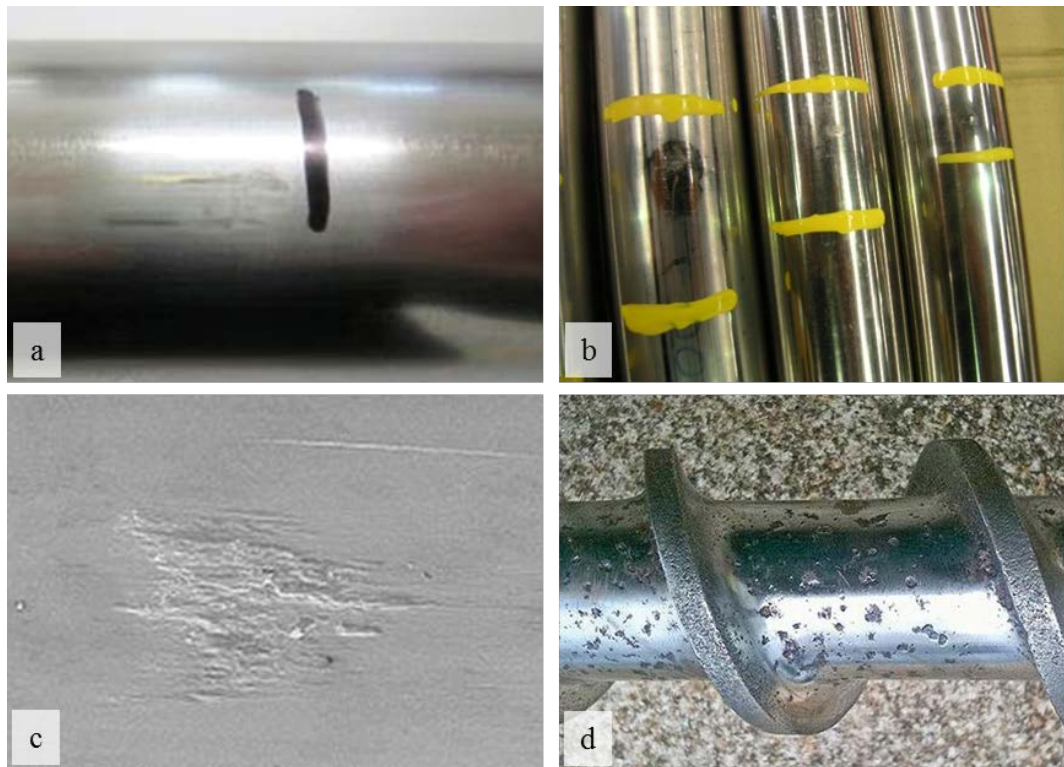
Examples of (a, b) sliding wear of Monel K500 piston rods (courtesy of MacTaggart Scott Australia), (c) galling [87], (d) pitting corrosion [88].
